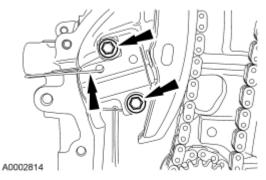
Locating Timing Chain Tensioner Bolts And Paper Clip Courtesy of FORD MOTOR CO.
